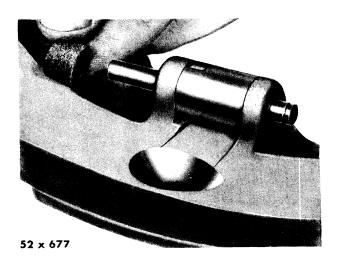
Installing Lubricating Washer on Adjuster Rod
